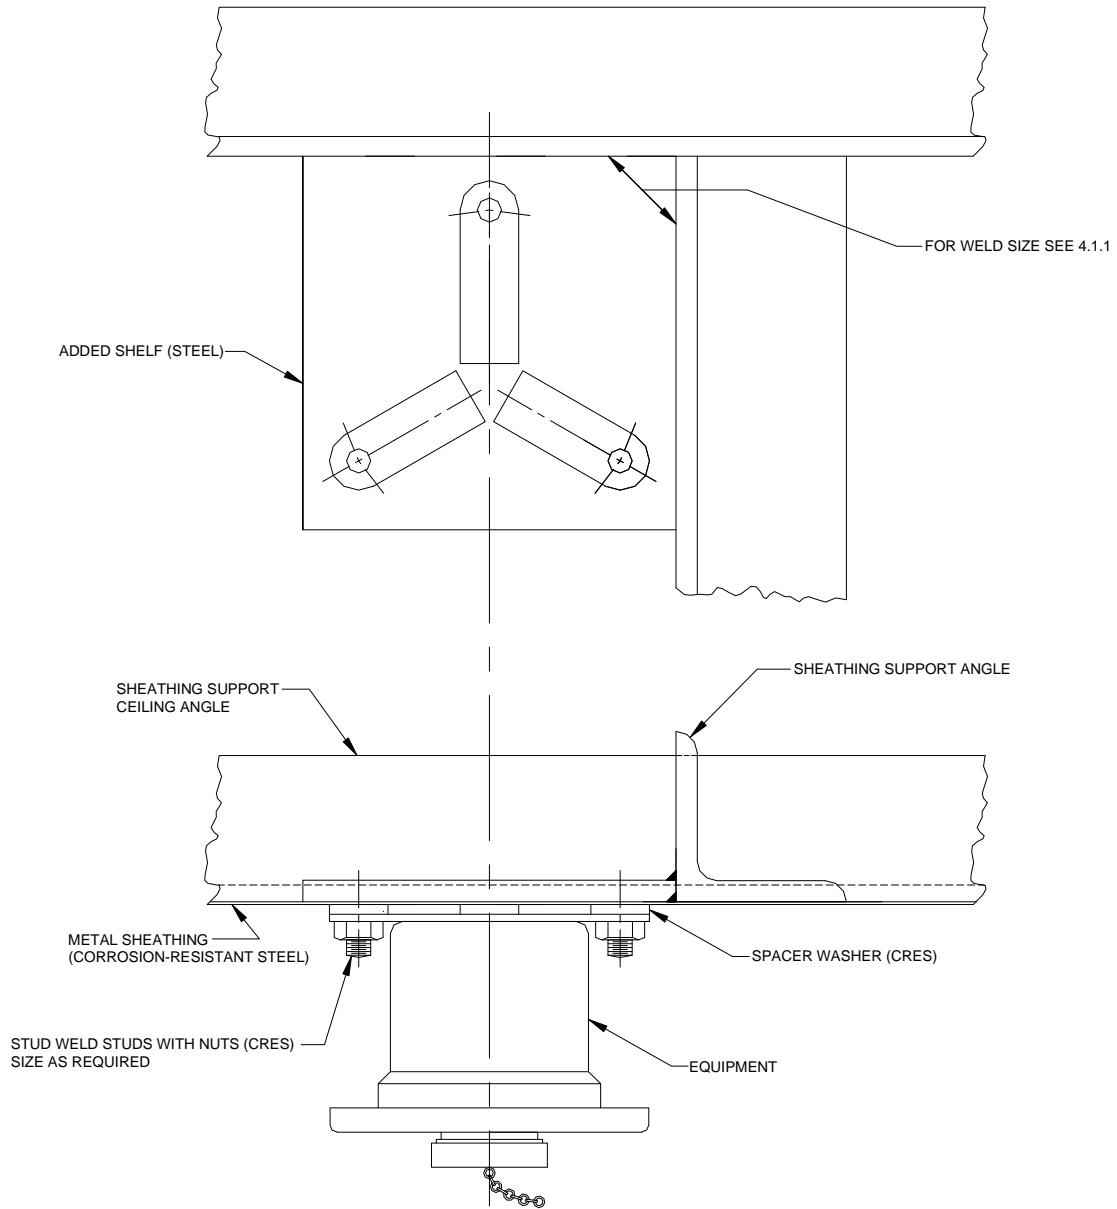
A16. Equipment mounted in refrigerated spaces.
